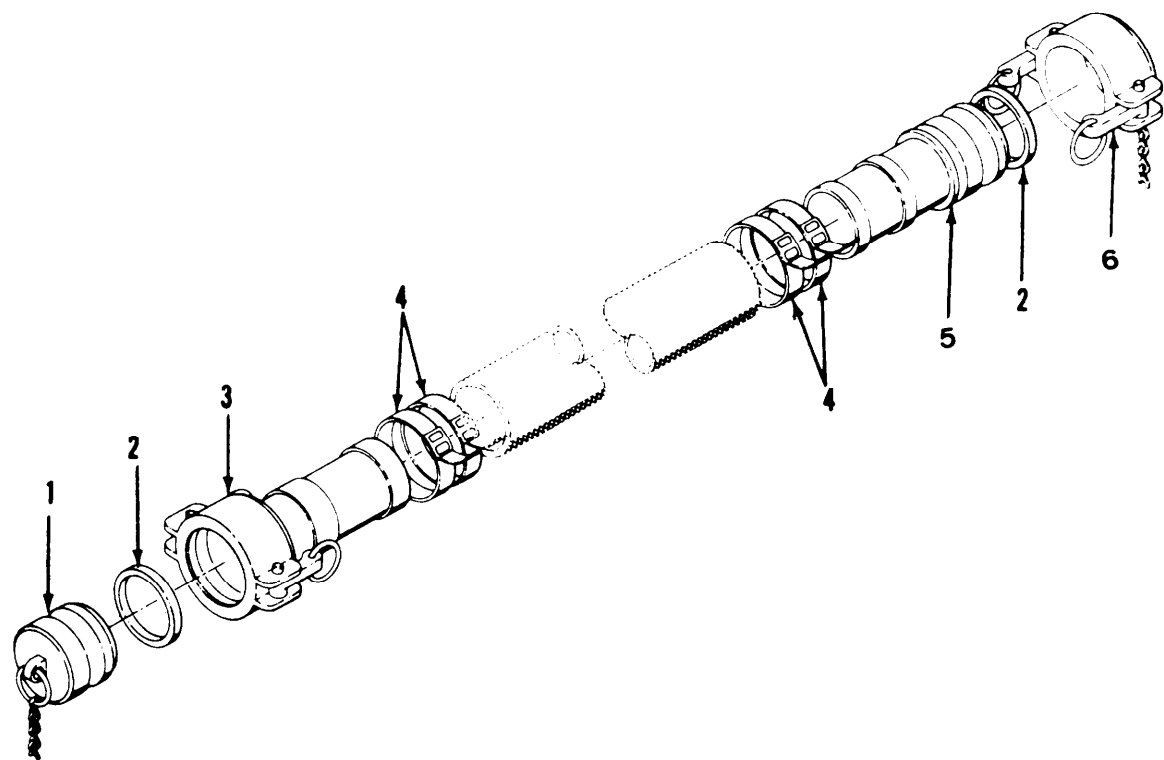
Discharge Hose Assembly, 3 In. X 25 Ft.
